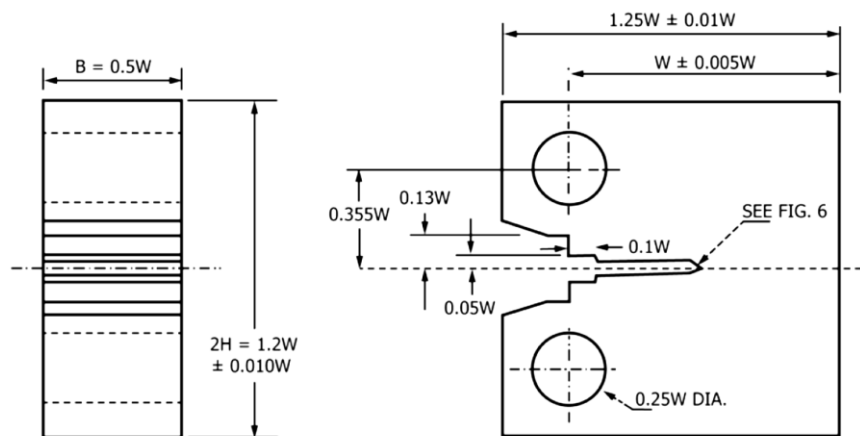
Size of a C(T) specimen according to ASTM E1820.
